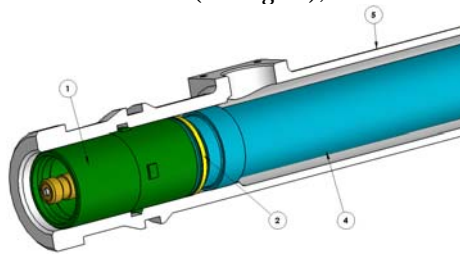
Schematic representation of the channel closure mounting inside of end fitting
